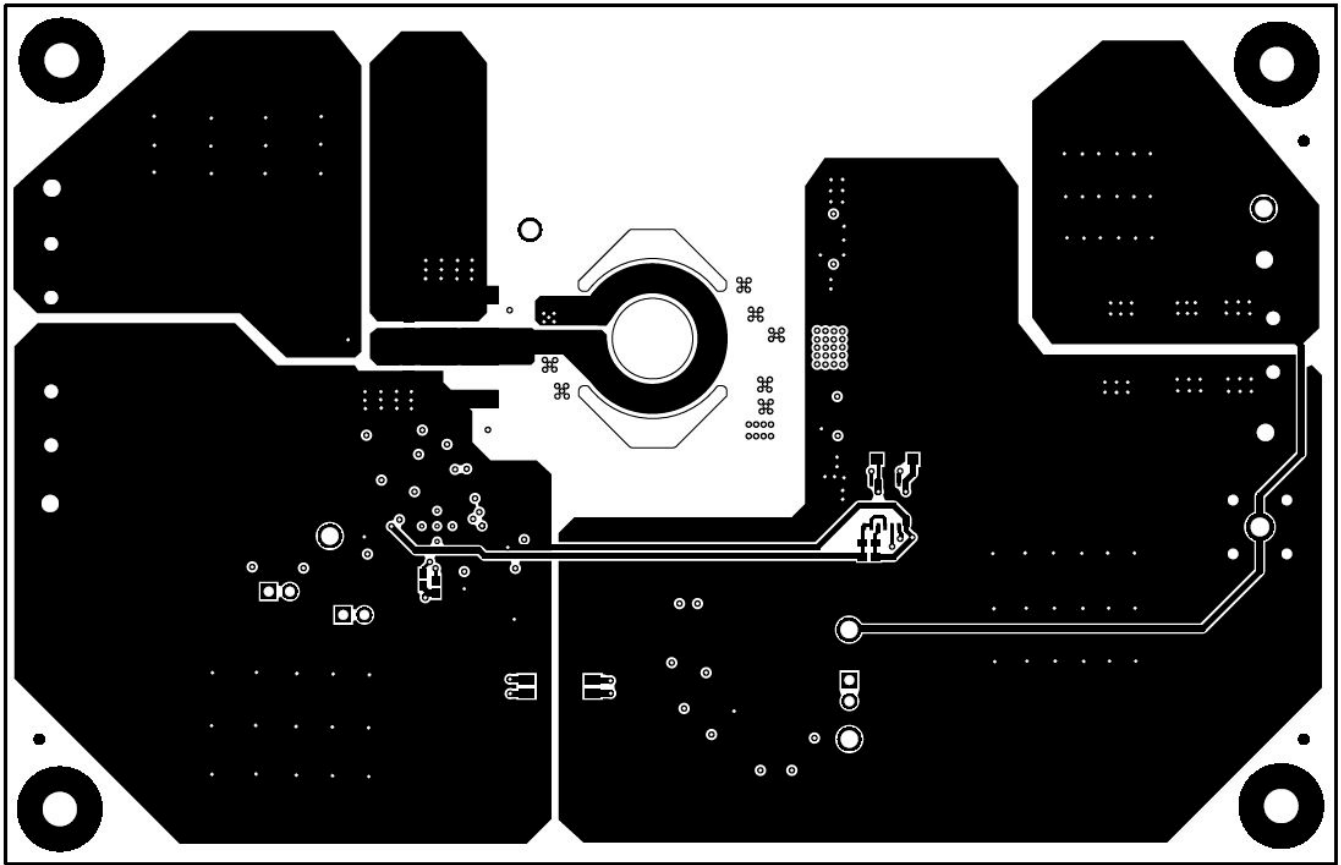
LM5036 EVM: Layer 10 PCB Assembly Layout
